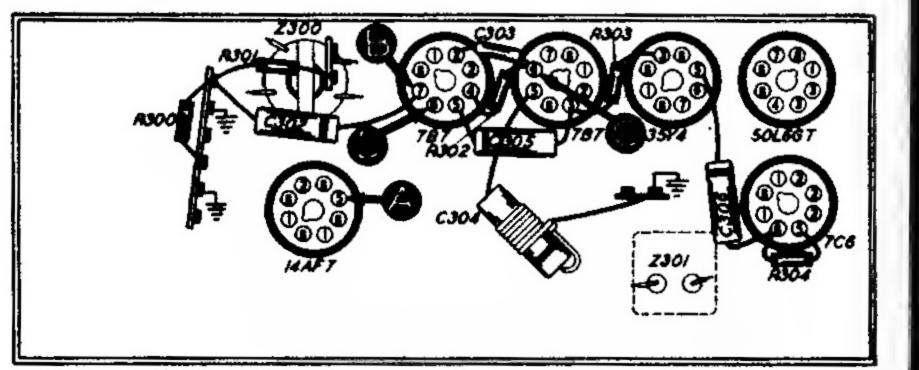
BOTTOM VIEW, SHOWING SECTION 3 TEST POINTS
